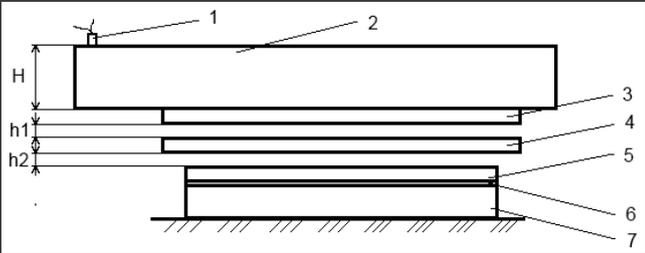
Scheme for explosion welding of a three-layered material: 1 – an electric detonator; 2 – an explosive charge; 3, 4 – throwing plates; 5 – a fixed plate; 6 – a layer of inert material; 7 – a steel base; H – the thickness of the explosive charge; h_1 , h_2 – technological clearances.
